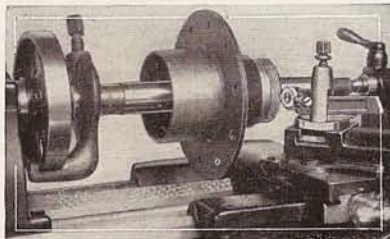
Chasing a Damaged Thread on a Front Wheel Hub Mounted on a Mandrel.
